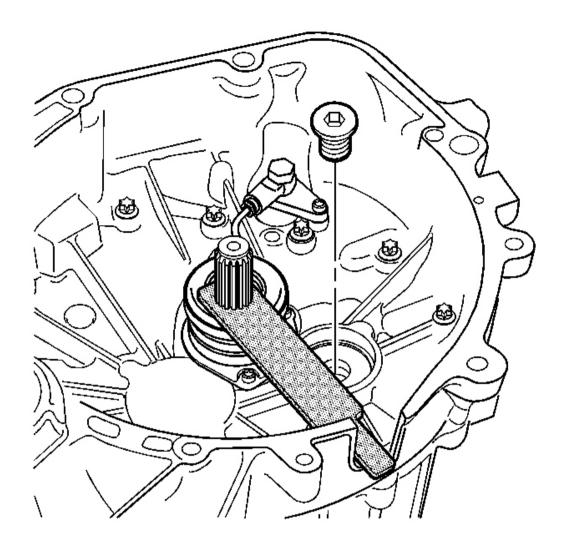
Intermediate Shaft, Input Shaft, J 44377 & Bolt Courtesy of GENERAL MOTORS CORP.
